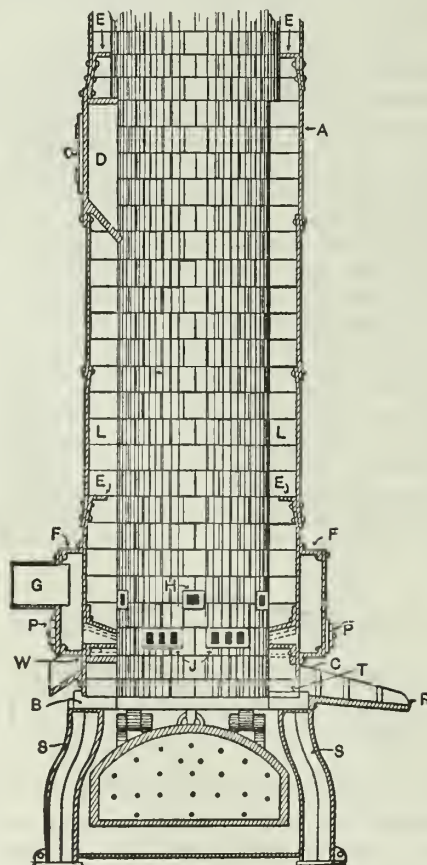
CROSS SECTIONAL ELEVATION OF NEWTON CUPOLA
